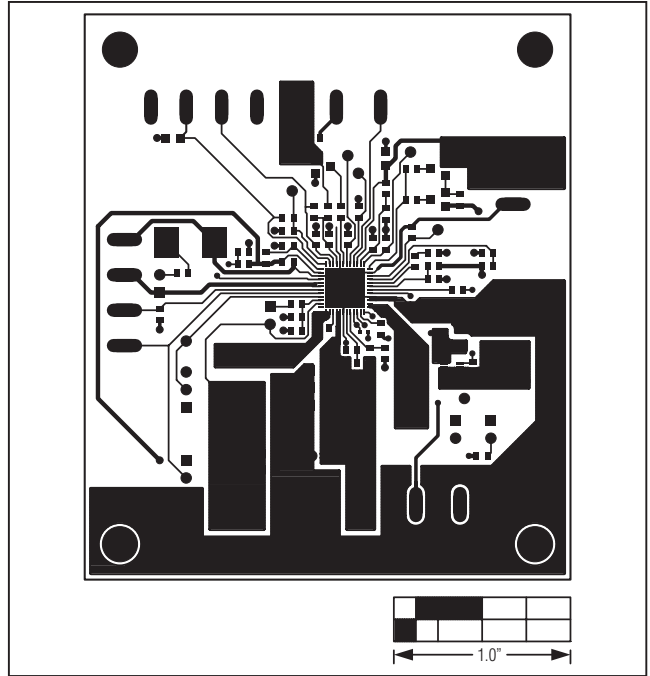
MAX17114 EV Kit PCB Layout—Component Side
